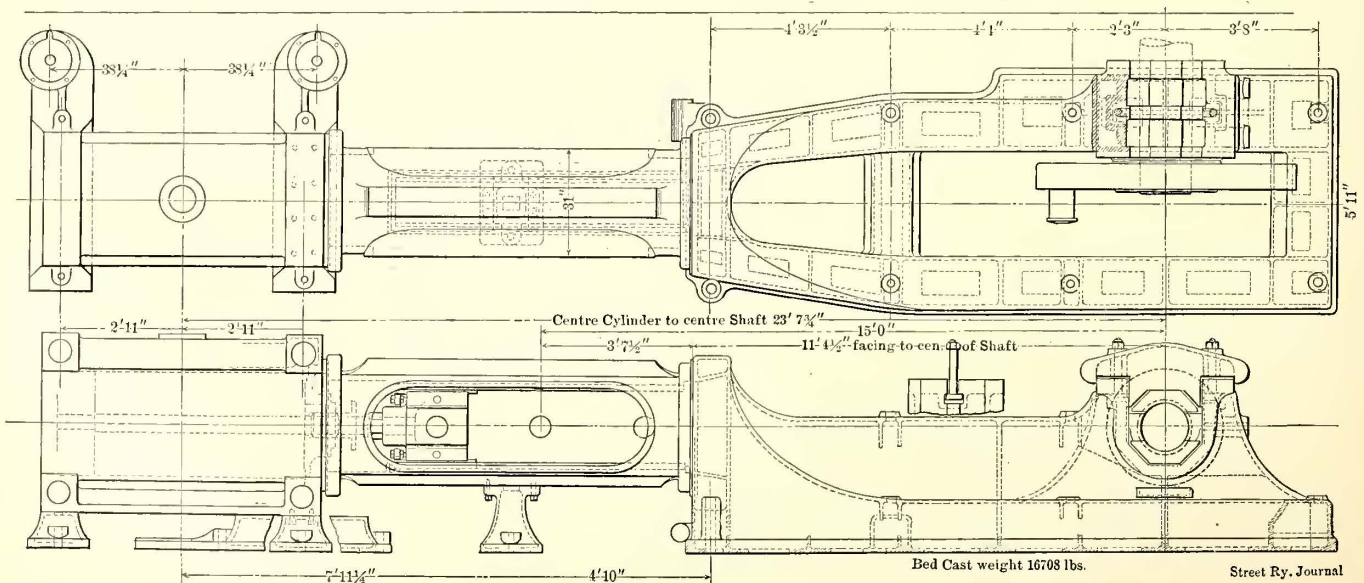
PLAN AND SIDE ELEVATION OF FRAMING—WHITEHILL-CORLISS ENGINE
